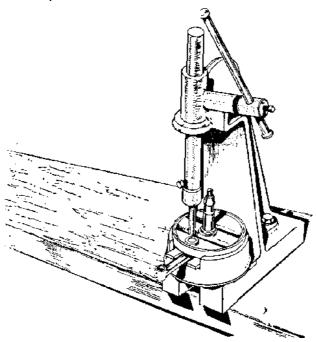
Parting the flywheels with Service Tool 61-3206.
